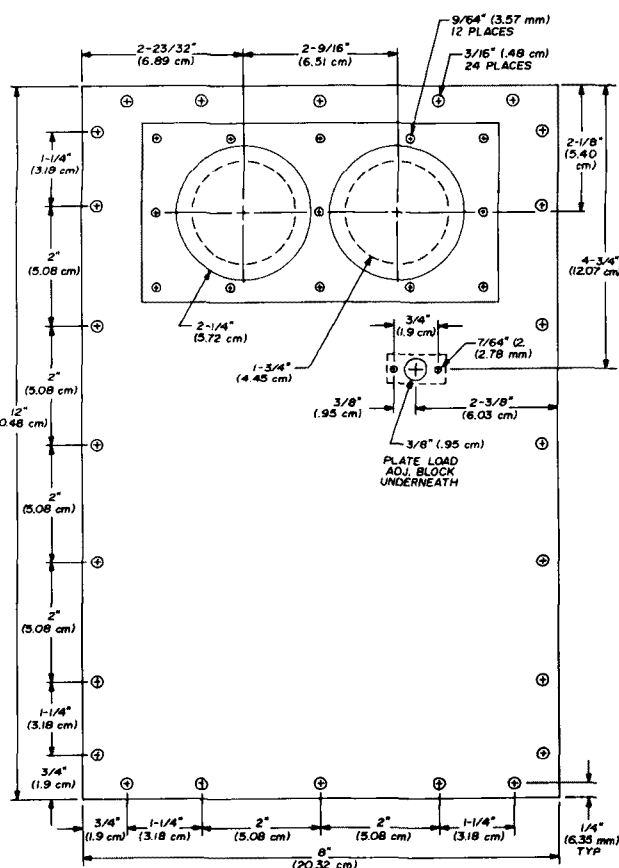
Bottom view of the top plate of the two-meter kilowatt. Top plate is made from 3/32-inch (2.5mm) aluminum sheet; vent plate is made from 3/16-inch (4.5mm) thick aluminum. The dashed 1-3/4-inch (4.5cm) circle is for 4CX250R and similar tubes; the 2-1/4-inch (5.7cm) circle is for the recommended 8390 tubes. A piece of aluminum screen is cut to the same dimensions as the vent plate and mounted between the top plate and the vent plate.
